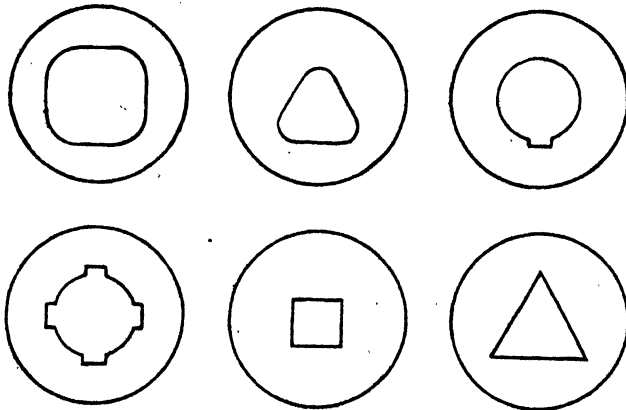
Examples of regular and irregular shapes produced by internal broaching.
